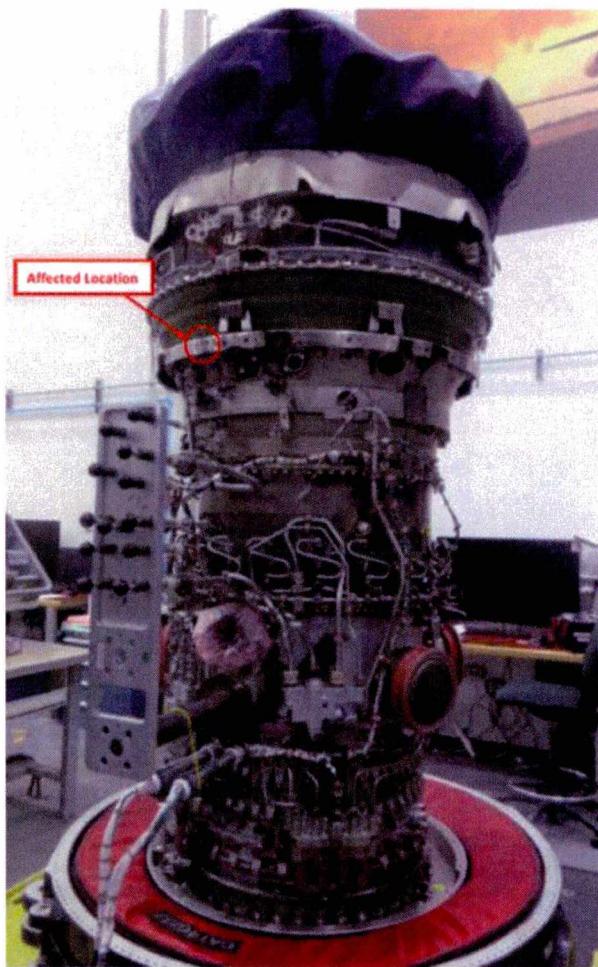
General view to show affected engine with deviated LPT Module Diaphragm Assemblies
